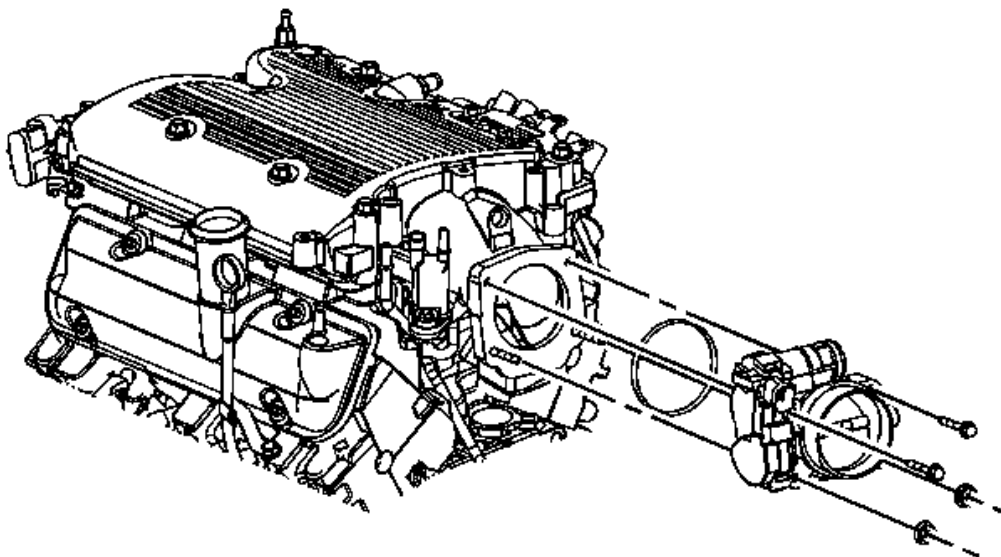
Identifying Throttle Body, Throttle Body Seal & Intake Manifold
